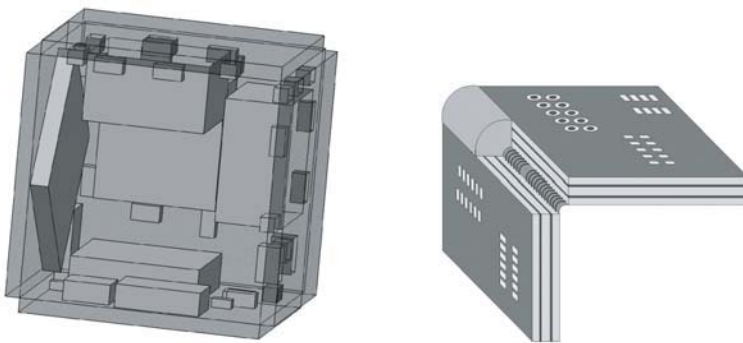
Left: Model of cubical IMU (one side opened for clarity); right: Wirelaid PCB
